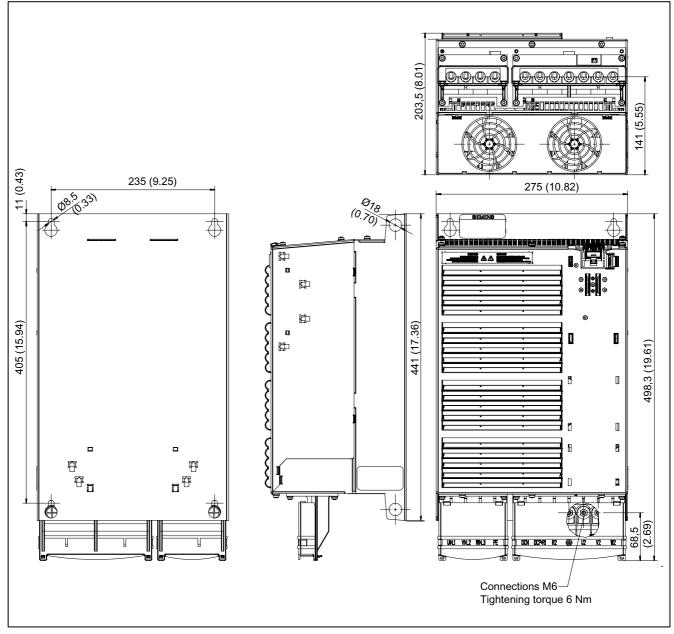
Dimension drawing: Power Module PM340, frame size FSE
